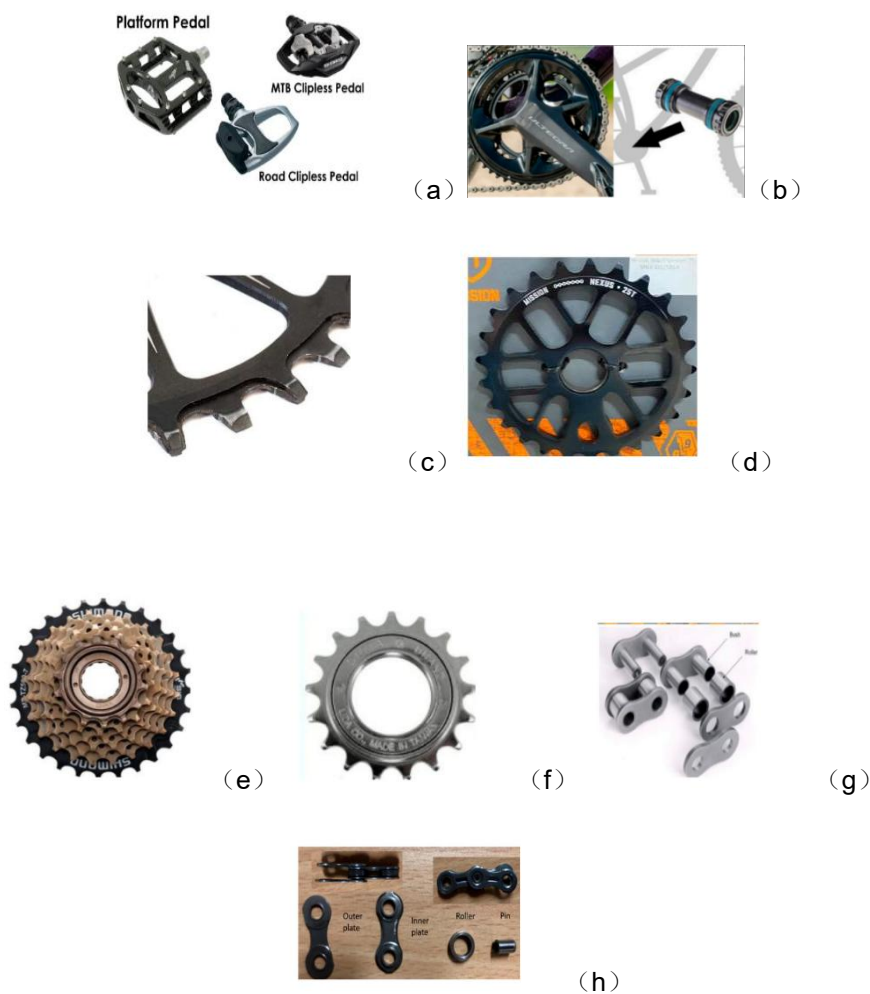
Components of the roller chain drive in a bicycle drivetrain system. (a) Pedal; (b) Crank arm and bottom bracket; (c) Wide-narrow chainring - single-speed/1× drivetrain system; (d) Uniform chainring - multi-speed transmission system; (e) Sprocket/gear - single-speed transmission system; (f) Cassette - multi-speed transmission system; (g) Bushed roller chain - single-speed transmission system; (h) Non-bushed chain - multi-speed transmission system.[34]
